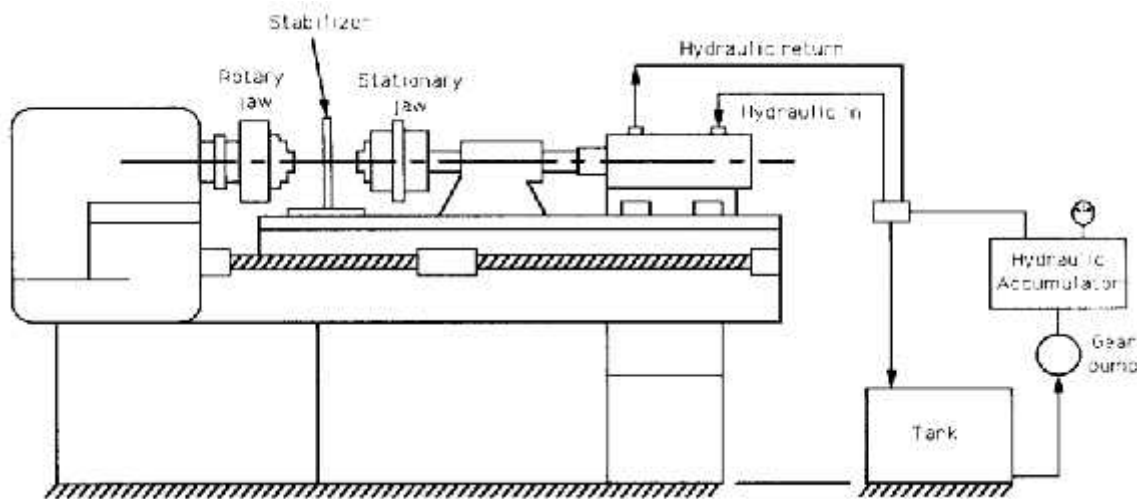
Friction welding setup (Yilba, 1995)
